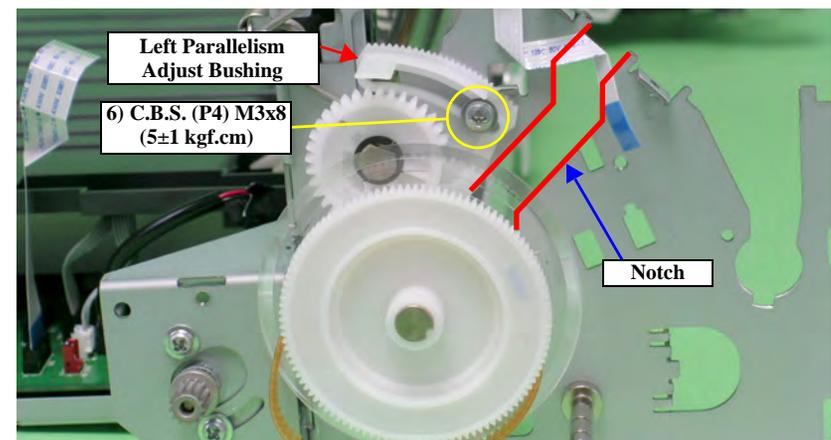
Rotating the Left Parallelism Adjust Bushing
